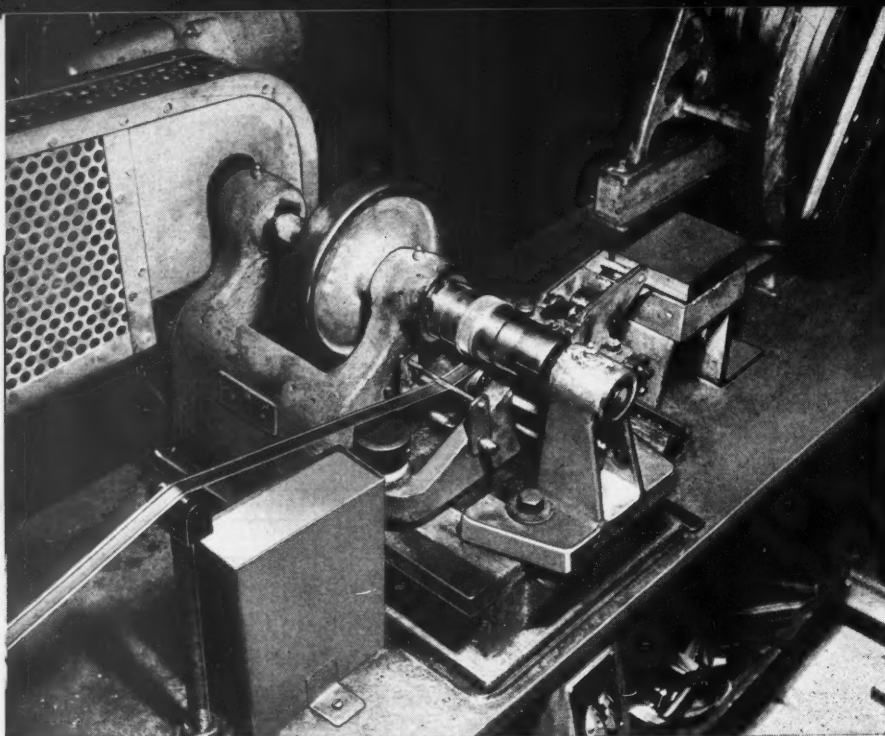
Continuous perforating of cold-rolled steel strip is accomplished between circular dies
